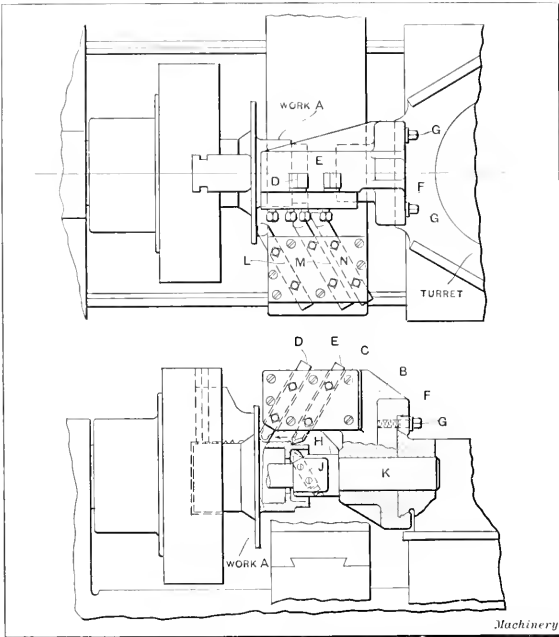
Multiple Tool-holder for machining Automobile Hubs
